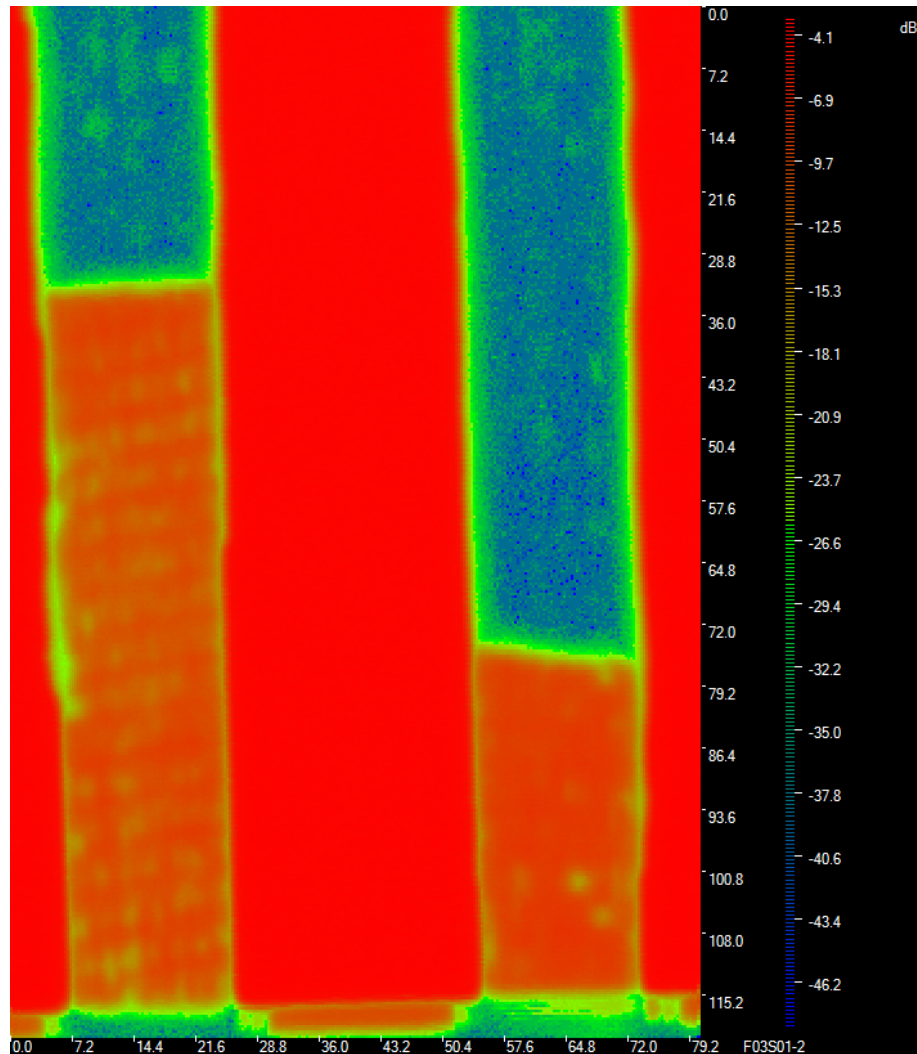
C-scan of crack front after fatigue test DCB on the left and ELS on the right, crack gauge was bonded on the left hand side of the specimens with regard to this scan, crack propagates from top to bottom
